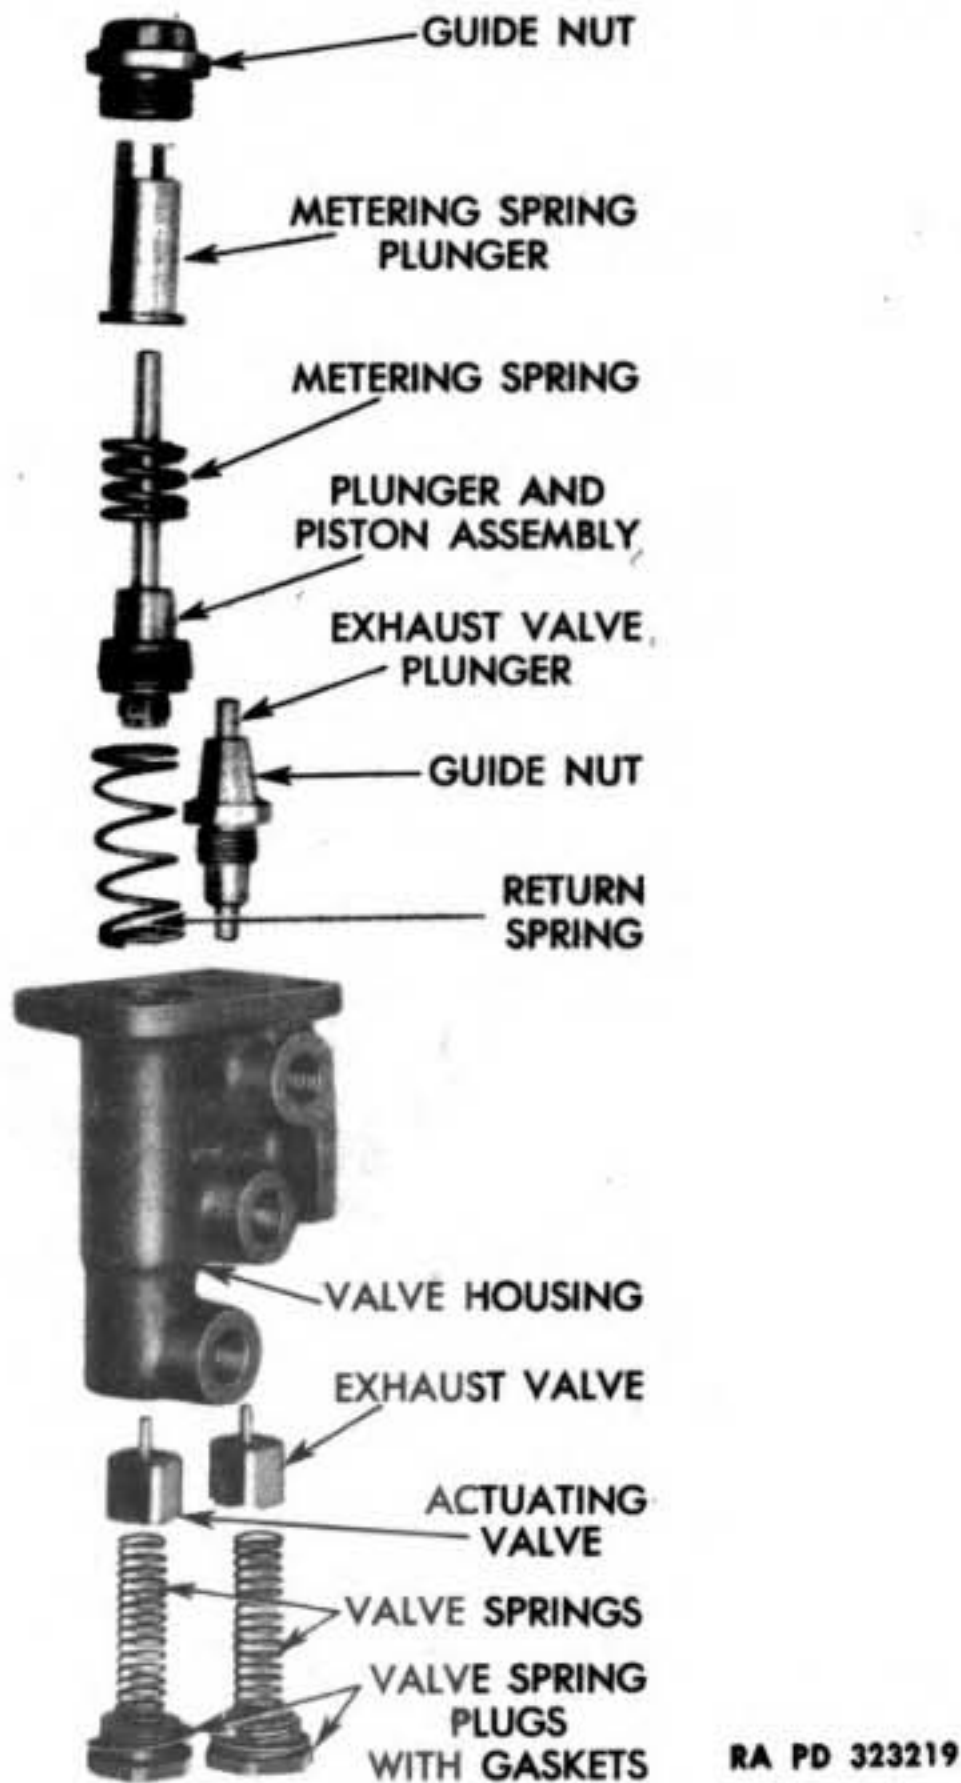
Air and Electric Brake Control Valve Housing Disassembled
